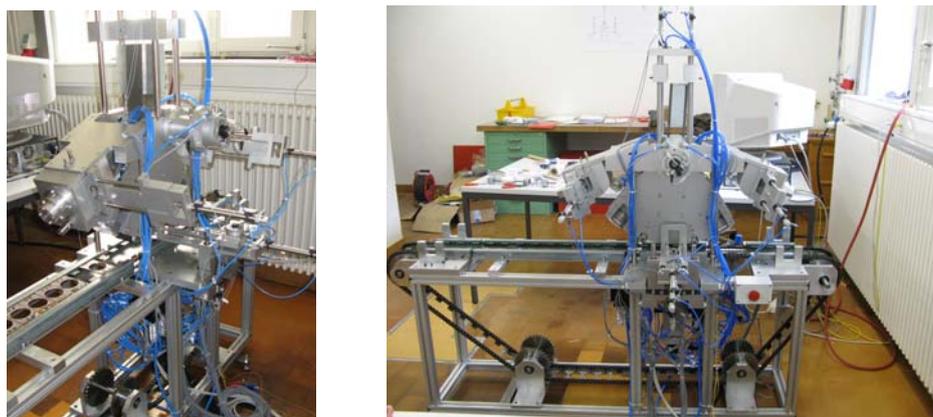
Fully automated stack actuator manufacturing machine “stacker”
